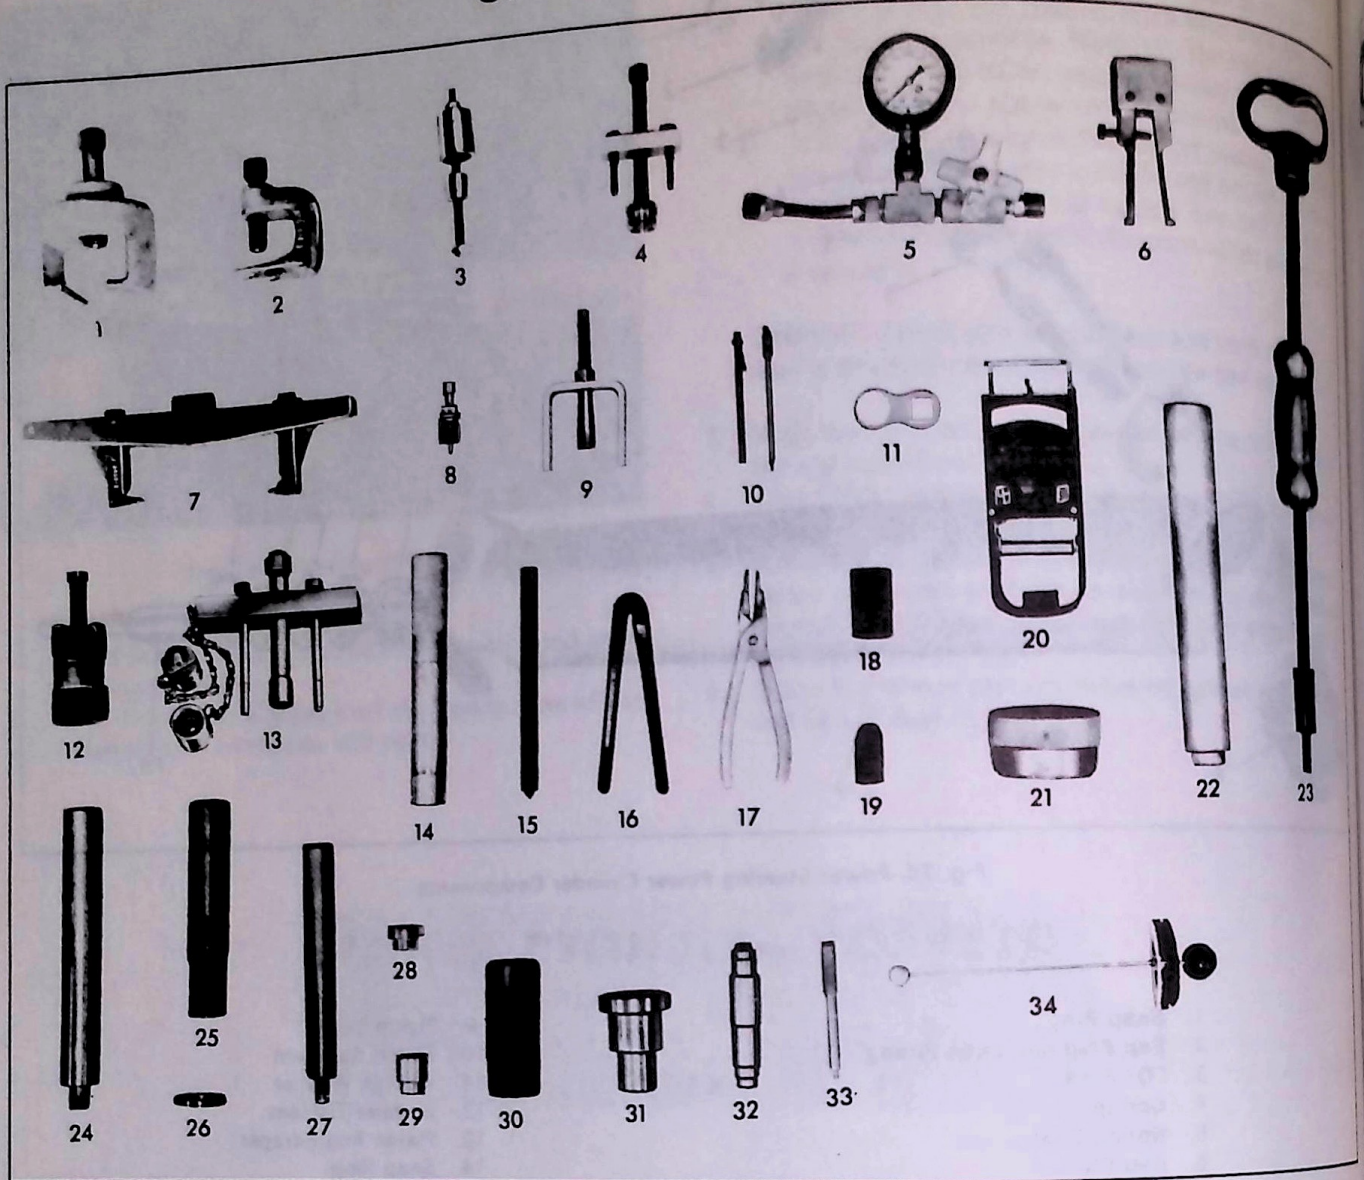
Manual and Power Steering Special Tools—Passenger Car
